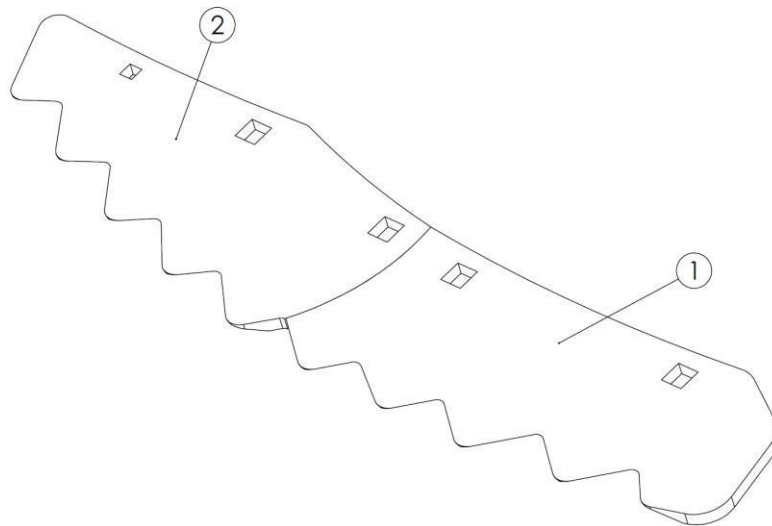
Blade sharpening: 1 - cutting knife I, 2 - cutting knife II
